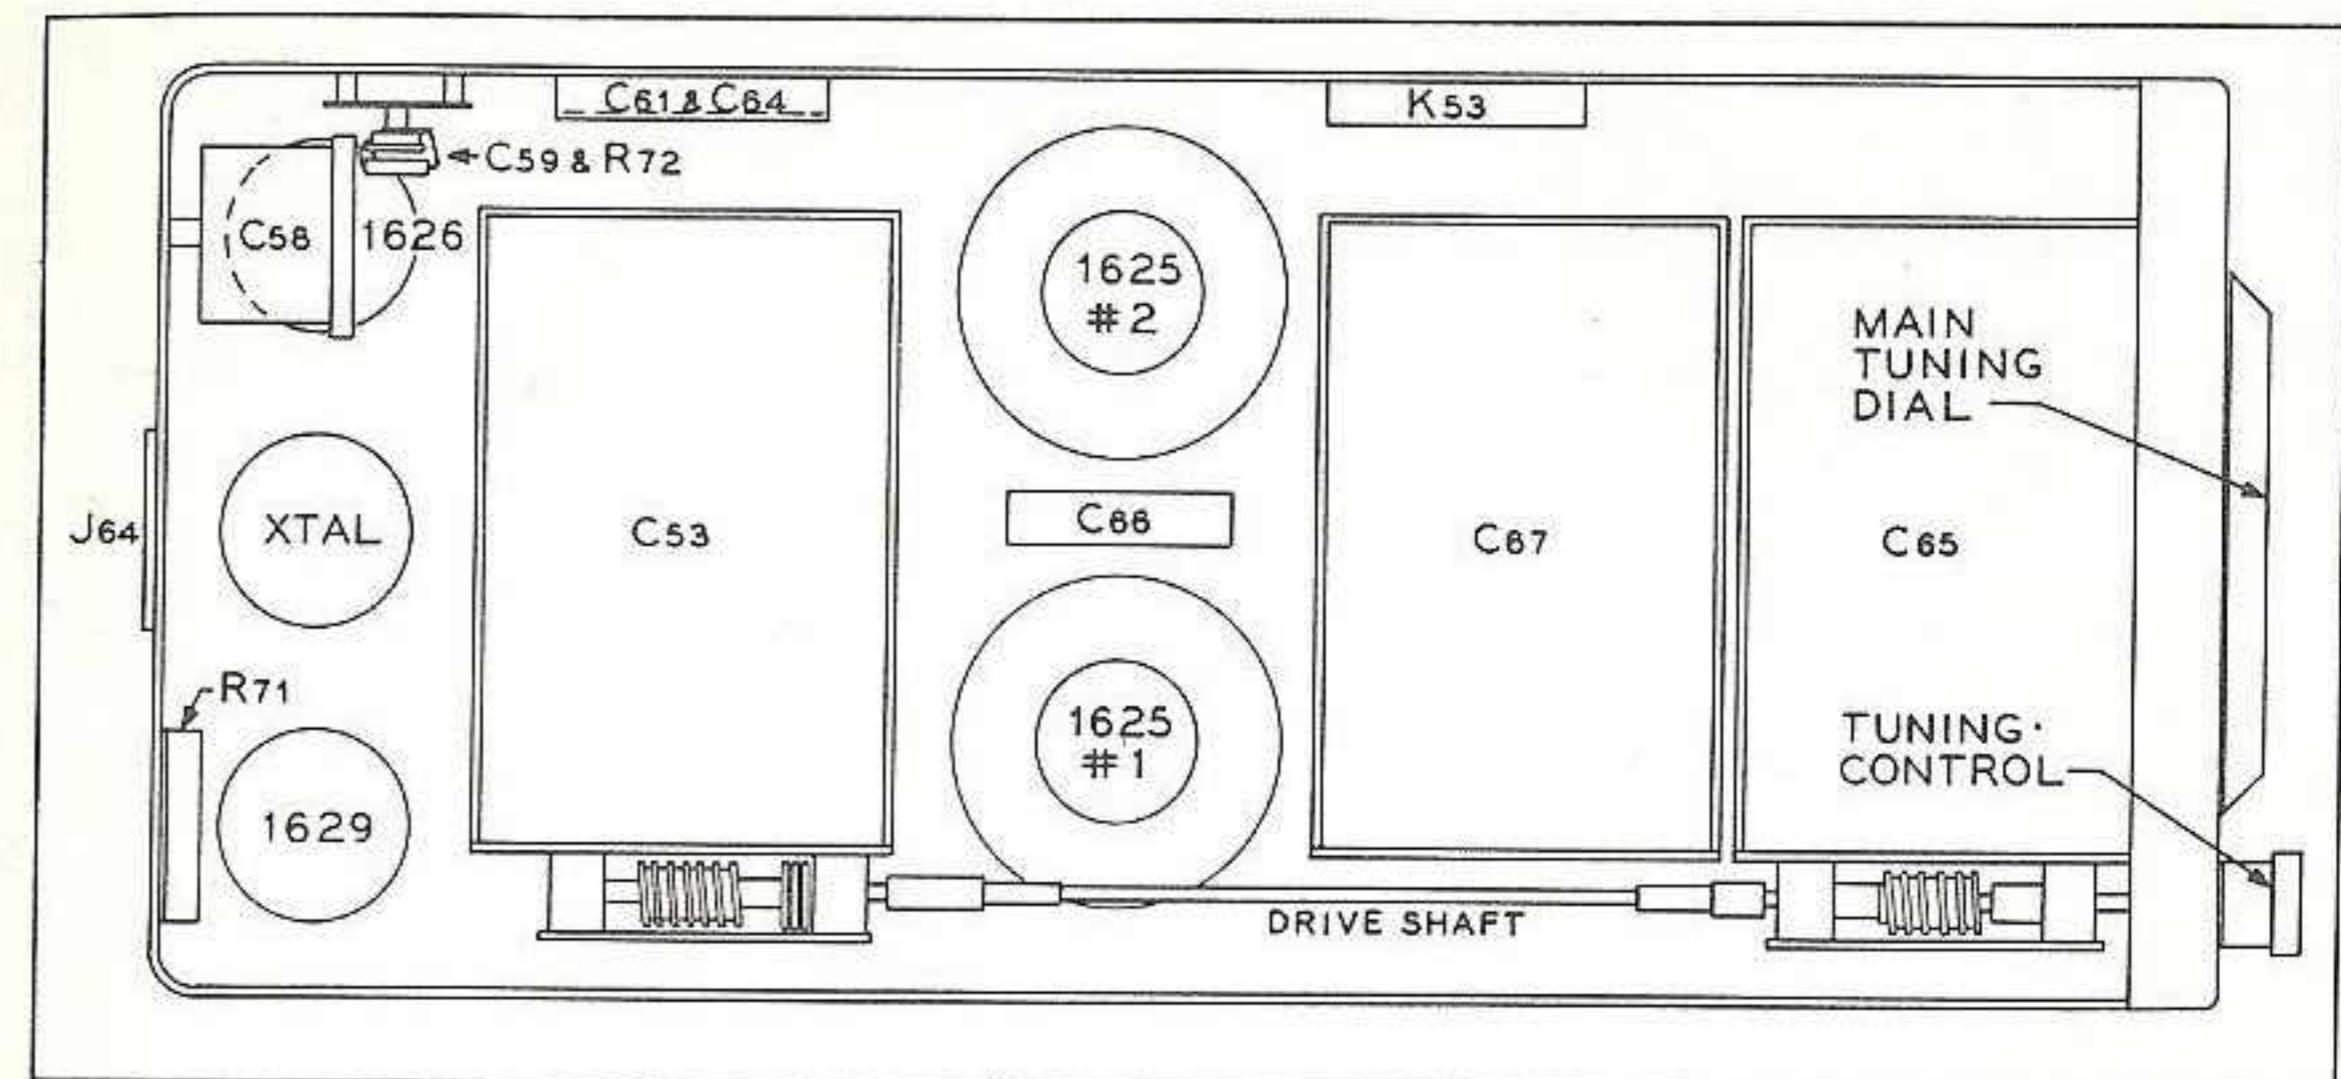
Under-chassis layout of typical "Command" transmitter, showing placement of major components. Oscillator padding capacitors are atop the chassis.
